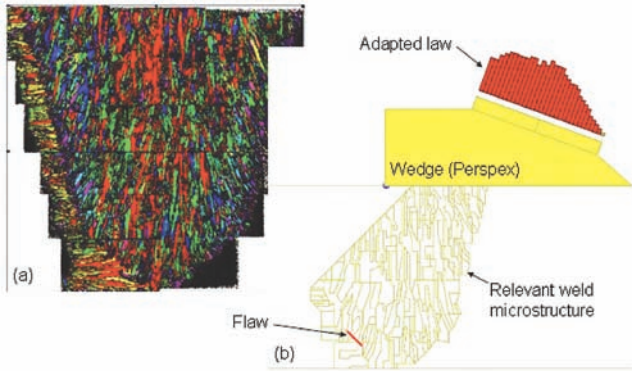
The inspection scenario on an 85 mm-thick austenitic weld, showing the adapted delay law generated for a 32-element linear array on a Perspex wedge designed to generate longitudinal waves: (a) shows the full weld map using EBSD and (b) shows the relevant part of the weld processed into the model
